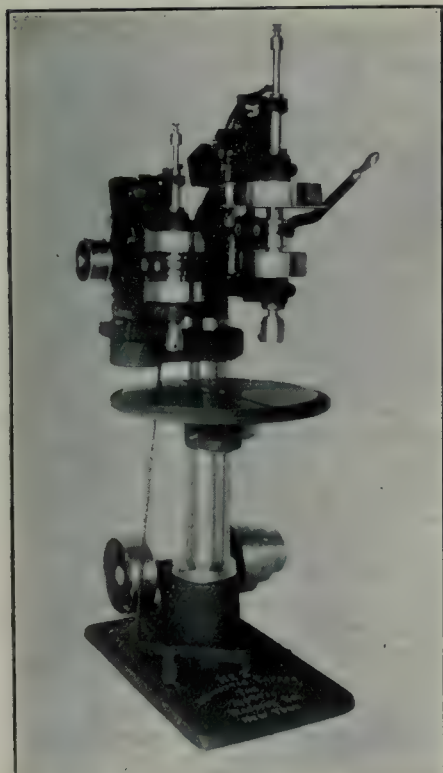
NO. 1-2 COMBINATION AUTOMATIC TAPPING MACHINE.
